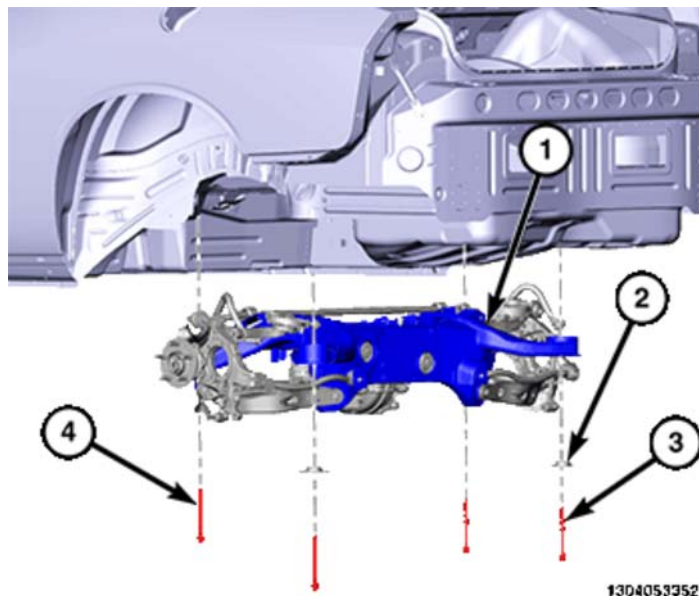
Rear Suspension Crossmember, Retainer Plates & Bolts
